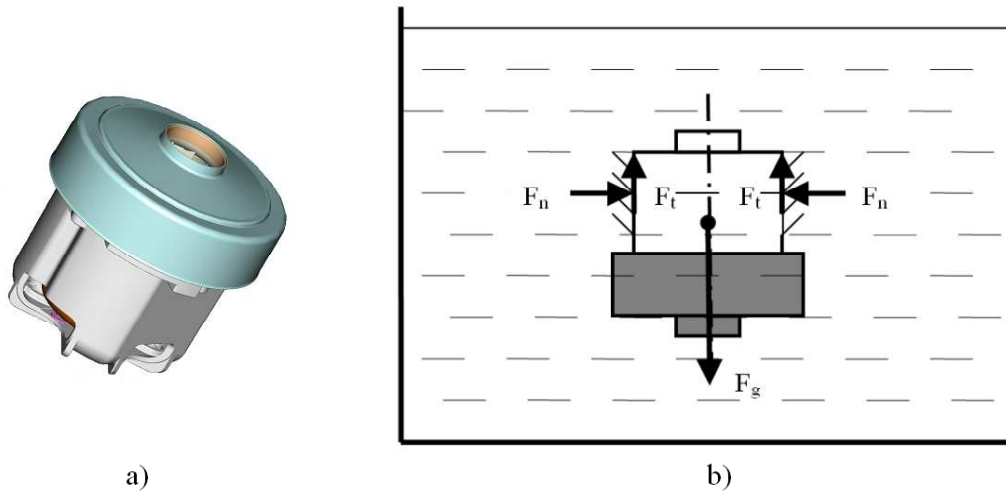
a) Vacuum cleaner motor and b) fixation of a vacuum cleaner motor in a liquid vessel.
